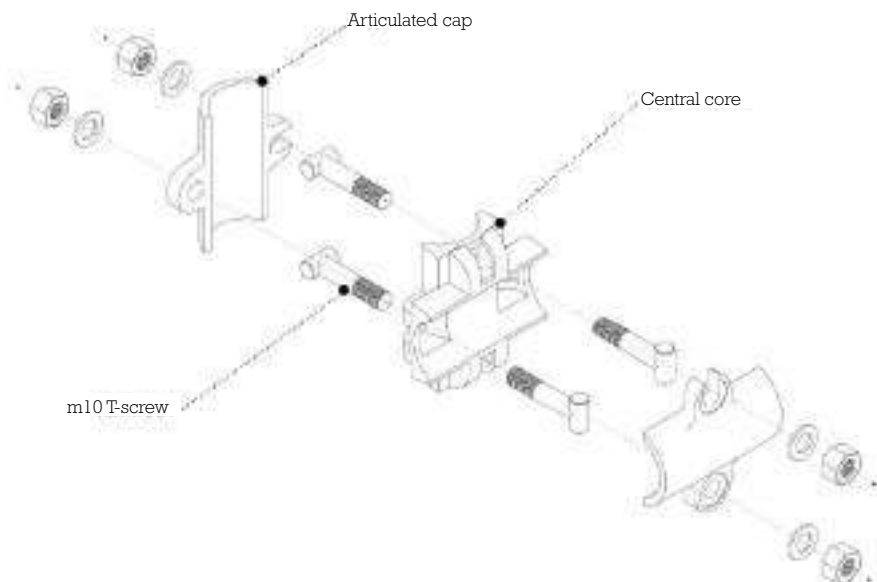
Construction detail - Orthogonal joint Dalmine Innocenti | Axonometric exploded view.
